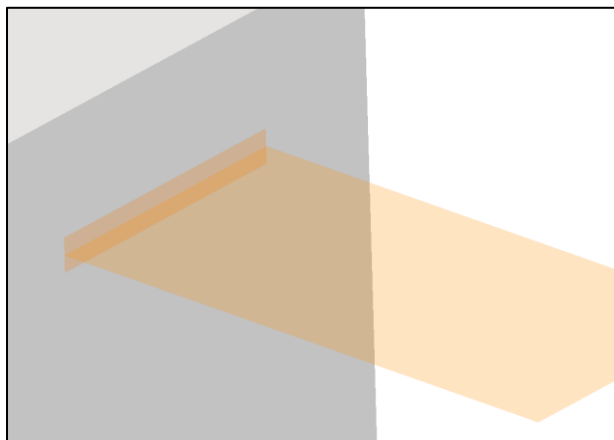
“T” SURFACE ADDED PERPENDICULAR TO THE SHELL BODY
